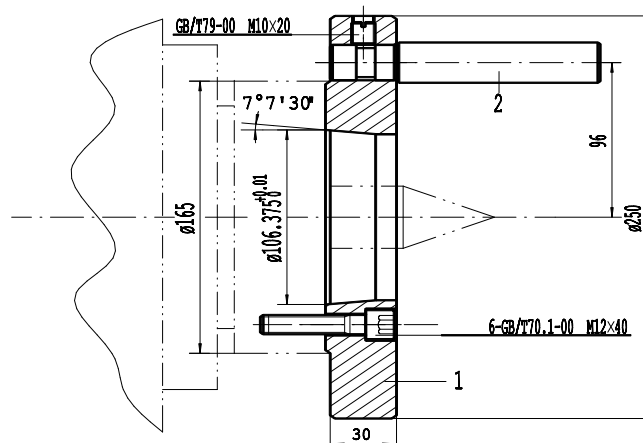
Mounting schematic of chuck, faceplate and drive plate
